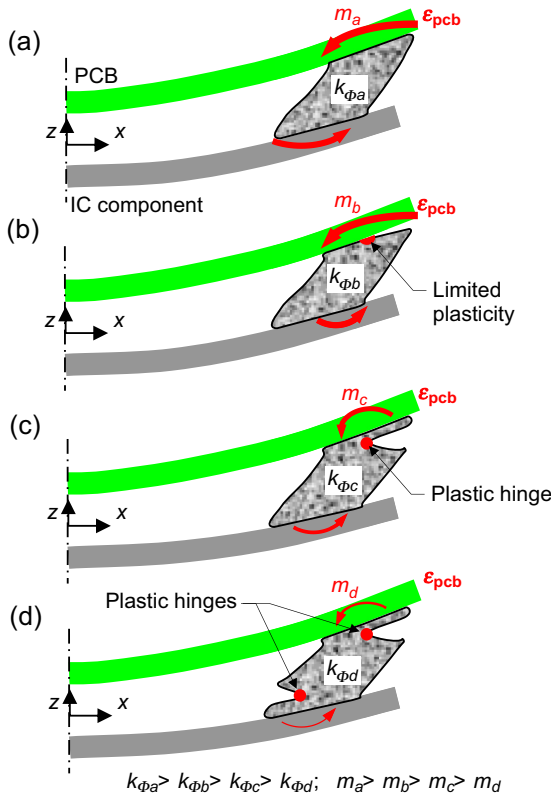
Flexural compliance of a solder joint: (a) no crack; (b) crack at PCB end in IMC; (c) crack at PCB end in solder; and (d) cracks at both ends in solder.
